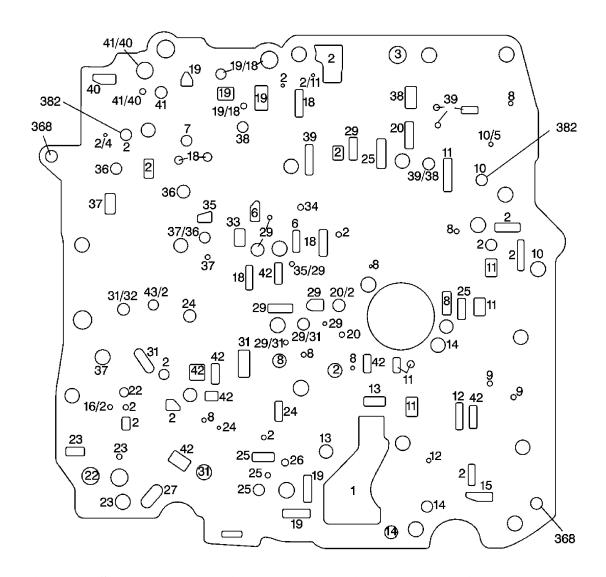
Spacer Plate Fluid Passages - Without Touch Activated Power Courtesy of GENERAL MOTORS CORP.
